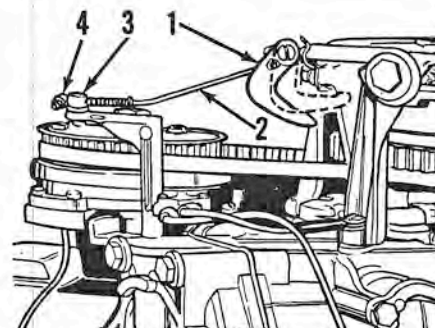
Schematic view of starter lock. Lockout lever (1) contacts starter pulley to prevent engine being started when shift lever is in gear. Refer to text for method of adjustment.
